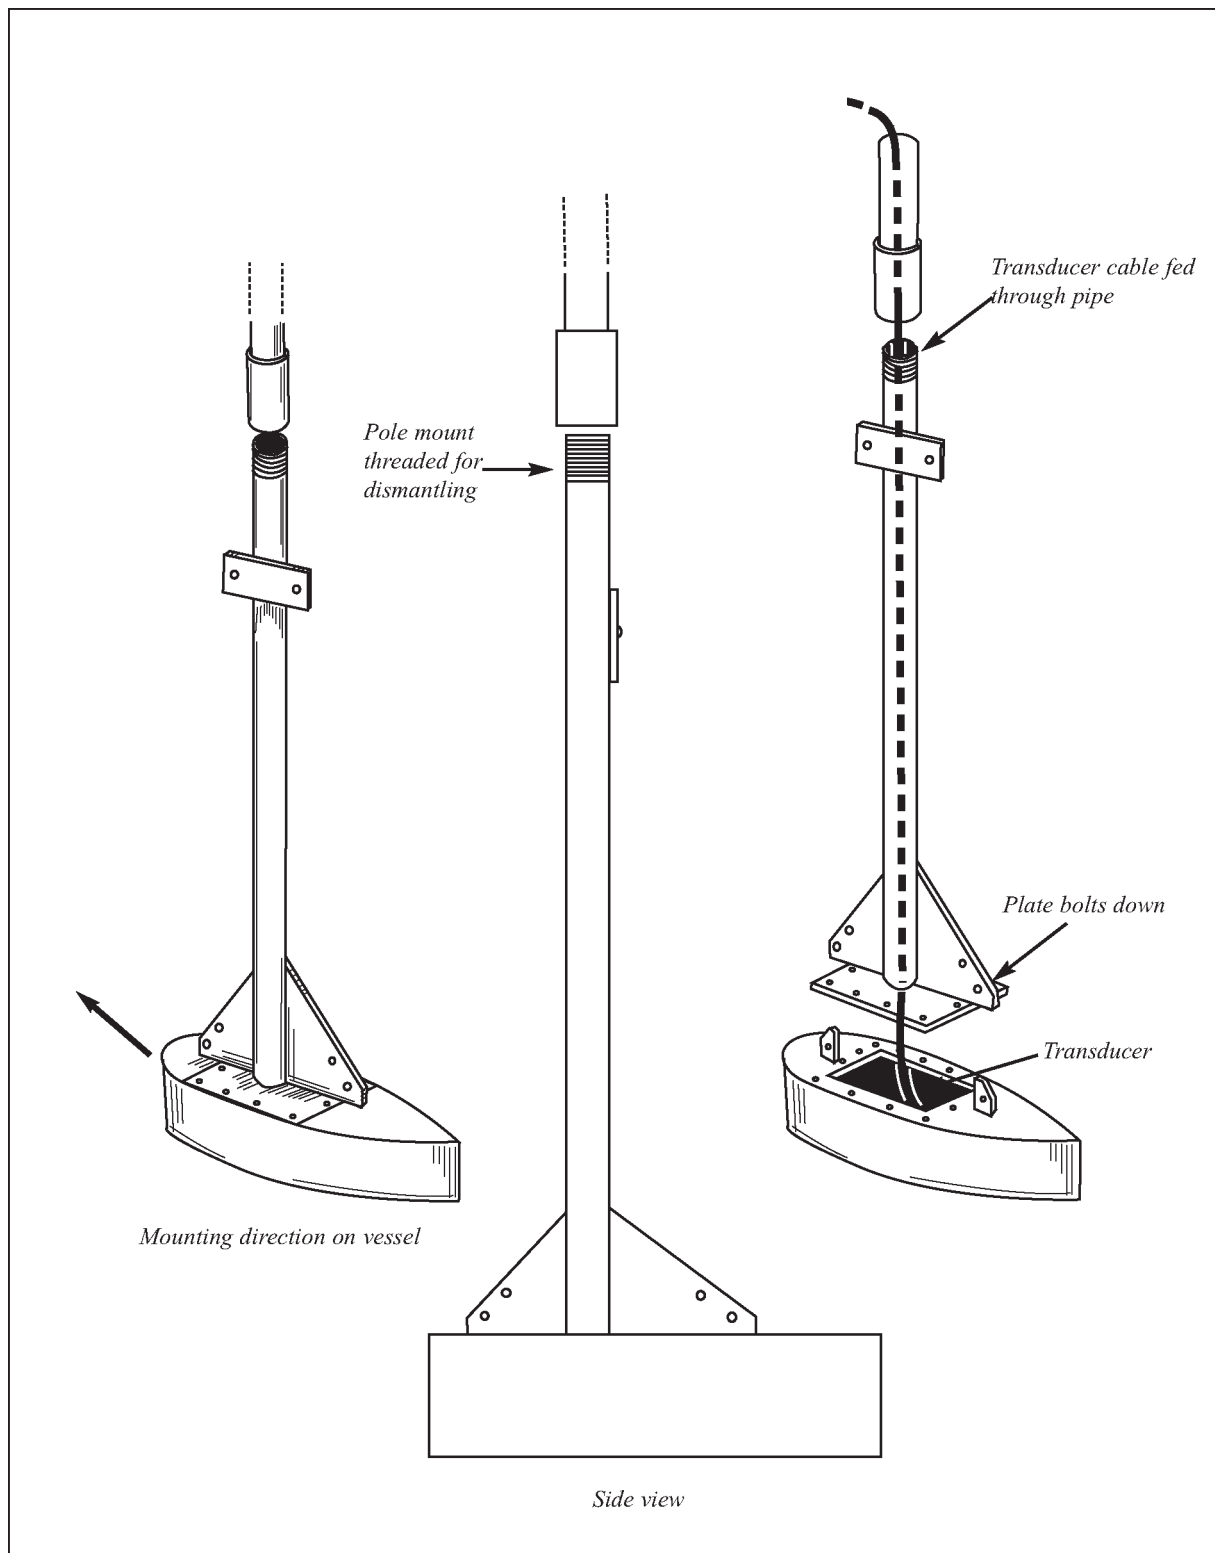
SPC's portable transducer mounting fabricated in welded aluminium.
